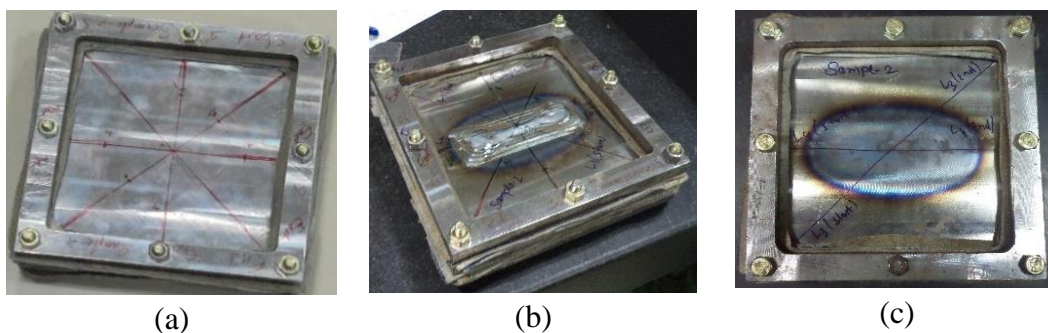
Setup used for spiral-in deposition pattern (a) Before weld-deposition (b) After weld-deposition: top view (c) After weld-deposition: bottom view.
